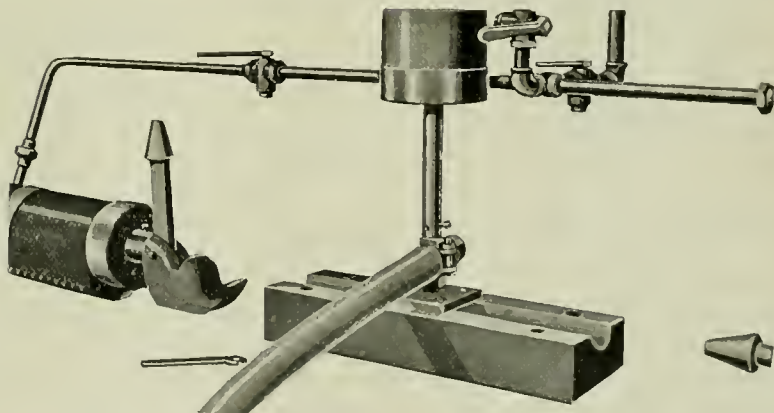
HOSE CLAMPING MACHINE USED ON THE SOUTHERN RAILWAY.
